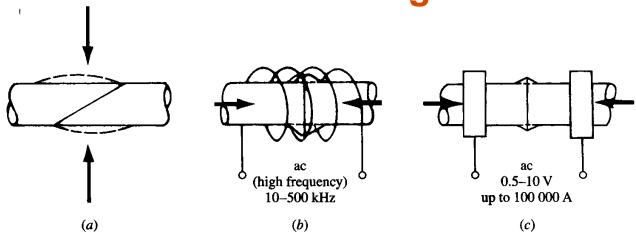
Elevated-temperature solid-state joining is obtained in (a) forge welding, (b) induction welding, and (c) electric butt welding.
